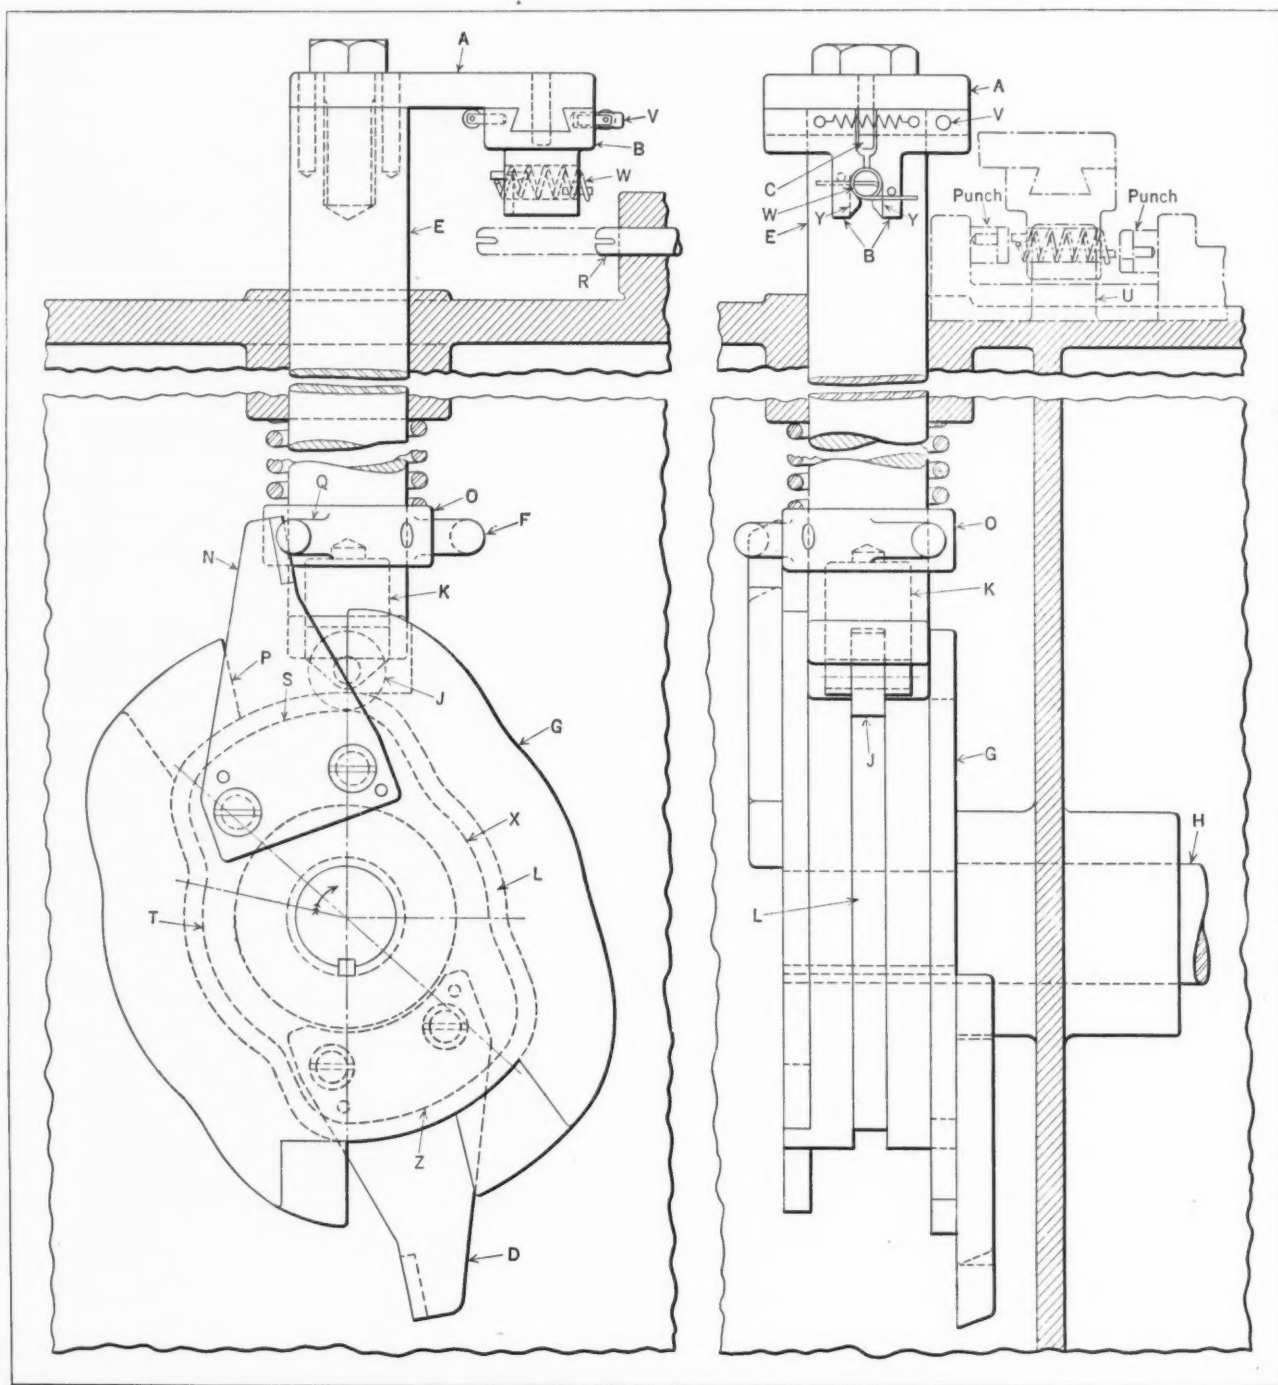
Cam Mechanism for Operating Transfer Arm of Spring-coiling Machine
